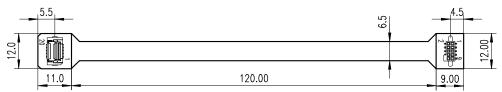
ECU Adapter ETAM8 (Bottom View)
